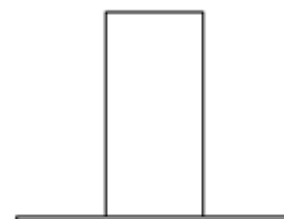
SIDE VIEW OF IMPACT ATTENUATOR.
